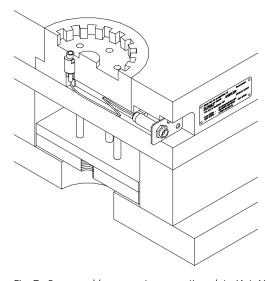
Sensor, cable, connector, mounting plate (Art. No. 3.520.328) and identification label (Art. No. 3.520.899)
